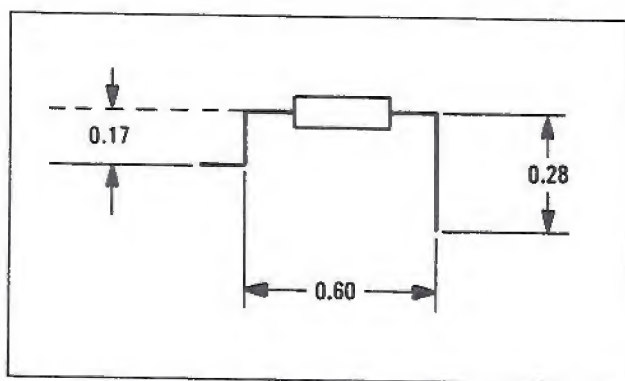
Mixer Diode Forming Dimensions in Inches
